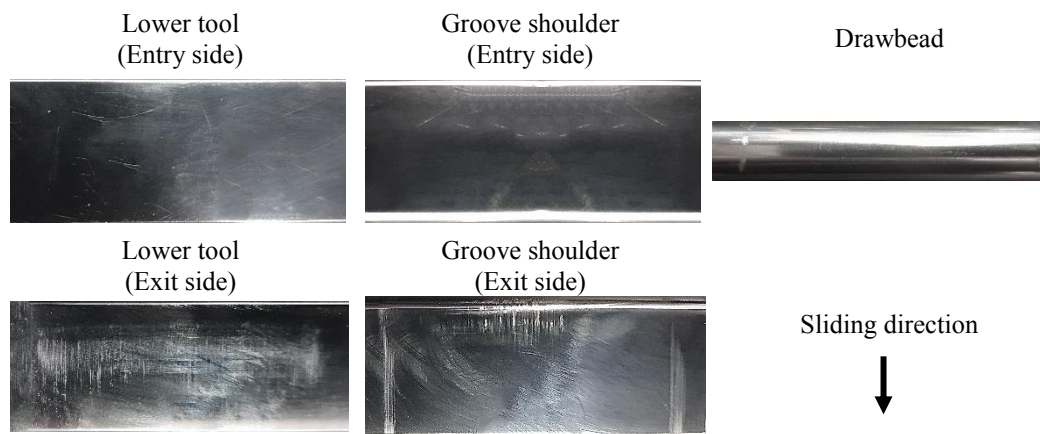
Overview of the surface structure of the drawbead tool tested with EN 1.4301 stainless steel and a 9mm bead penetration after 7 strokes.
